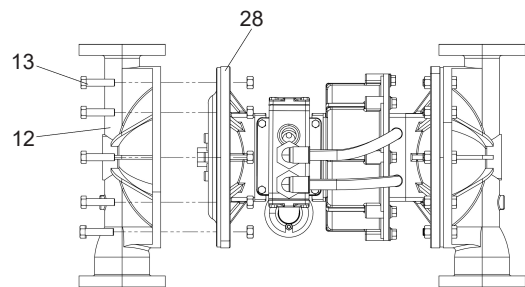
Disassembly of Outer Chamber外腔体拆卸
